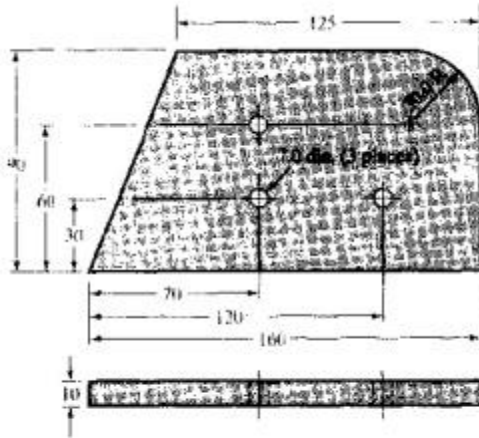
Sample part to illustrate NC part programming. Dimensions are in millimeters. General tolerance = ± 0.1 mm. Work material is a machinable grade of aluminum.
